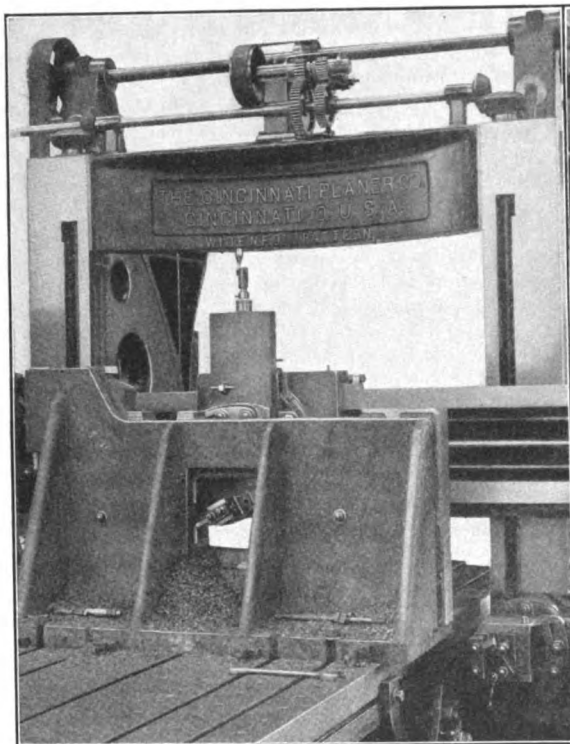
PLANING BEARING SPOTS ON HOUSING
